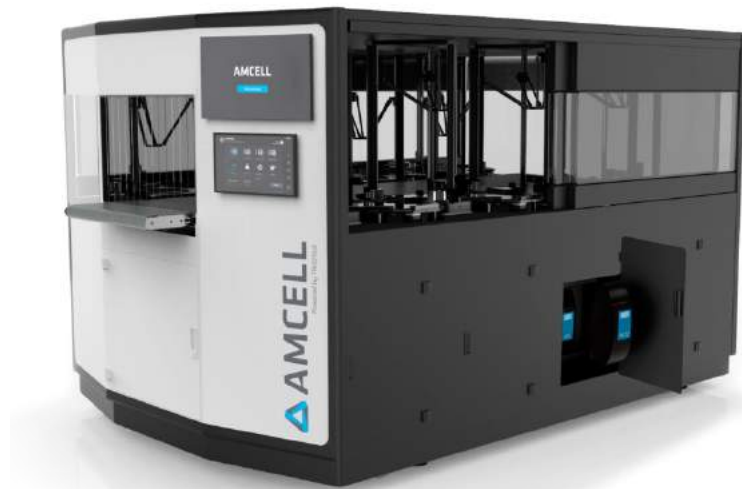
Triditive is developing its automated platform, AMCELL, in which a number of filament extrusion heads produce parts simultaneously and finished parts are automatically extracted from the machine on a conveyor system for debinding and sintering (Courtesy Triditive)
